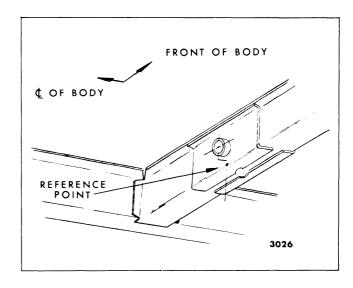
Side Rail at Rear Spring Rear Shackle Bushing
